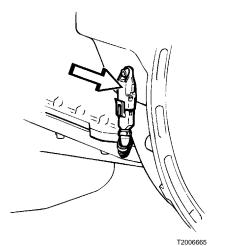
Engine Speed Sensor location on flywheel housing, D12A/B
